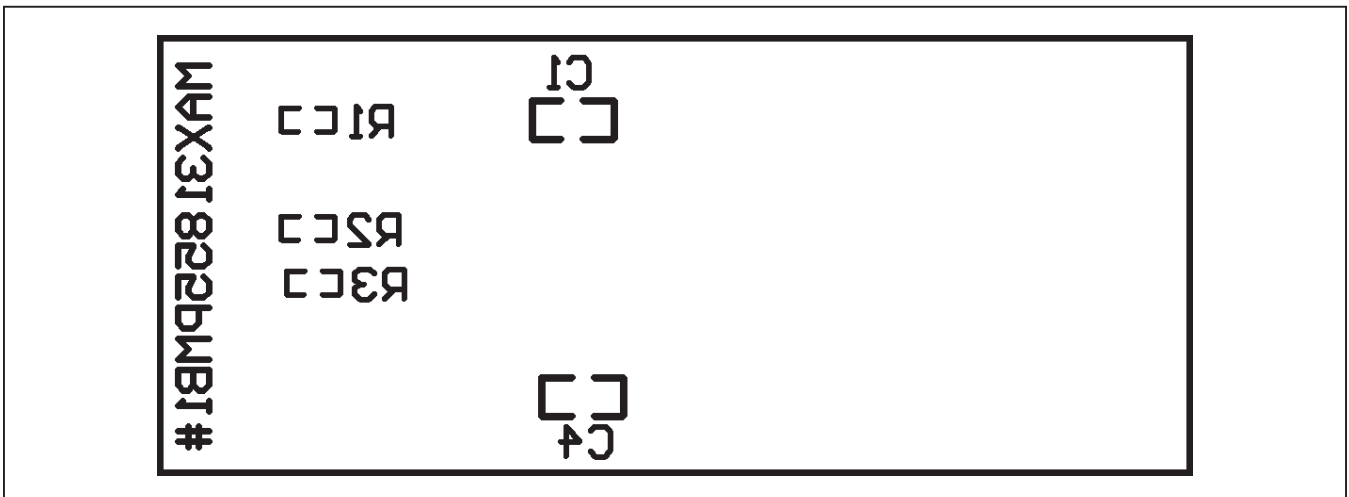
MAX31855PMB1 Peripheral Module Component Placement Guide—Solder Side
